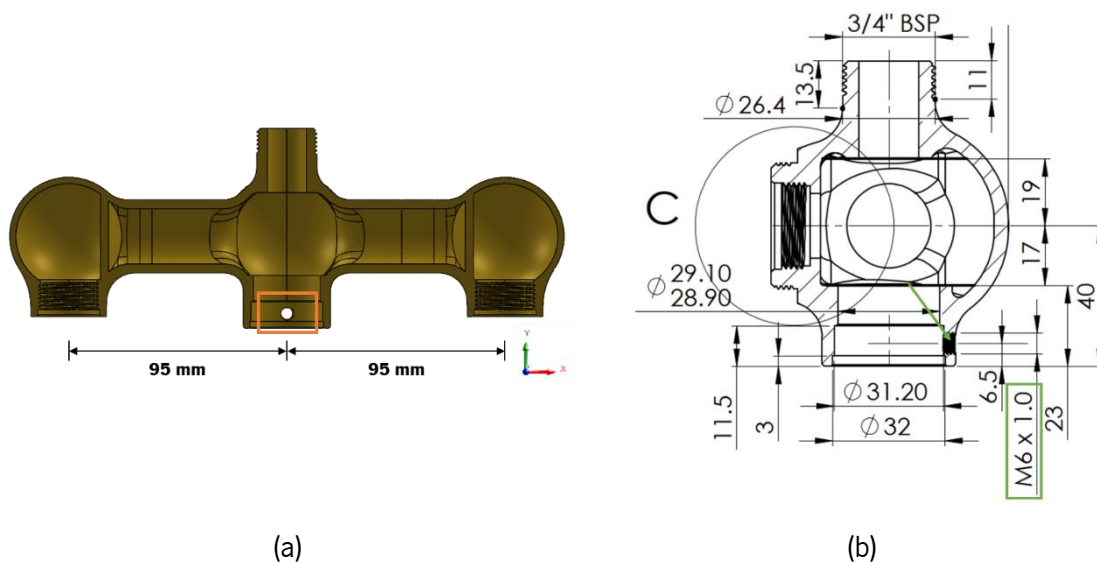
Section view of the hole in the central body: (a) in the mixer; (b) on the drawing (detail of its position and dimensions).
